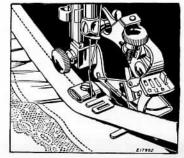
Making a Ruffle and Attaching It With a Facing In One Operation
